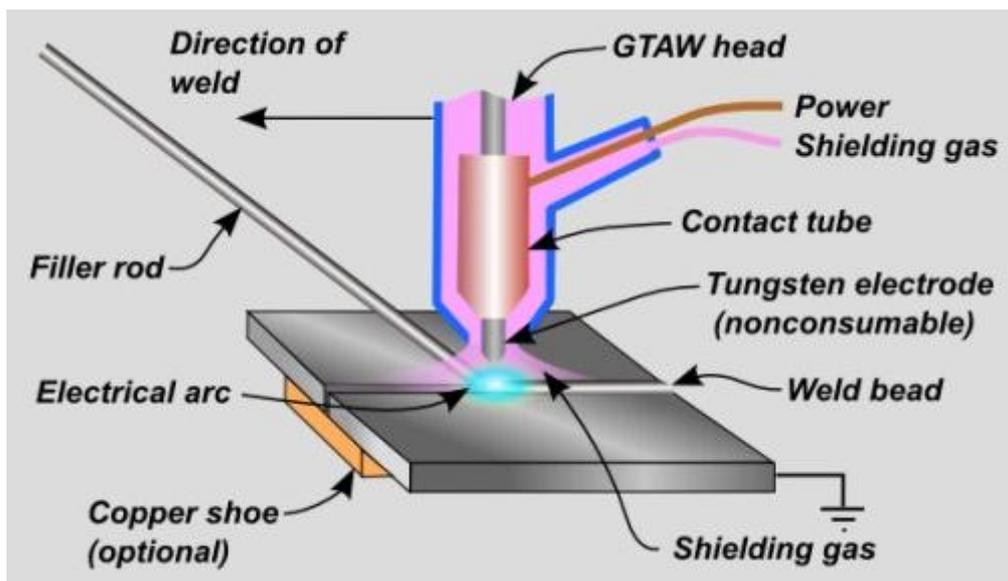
Schematic of tungsten inert gas welding process
